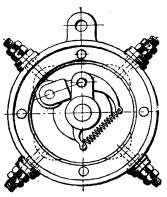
Internal Wipe Contact Breaker for Four-cylinder Motor.
